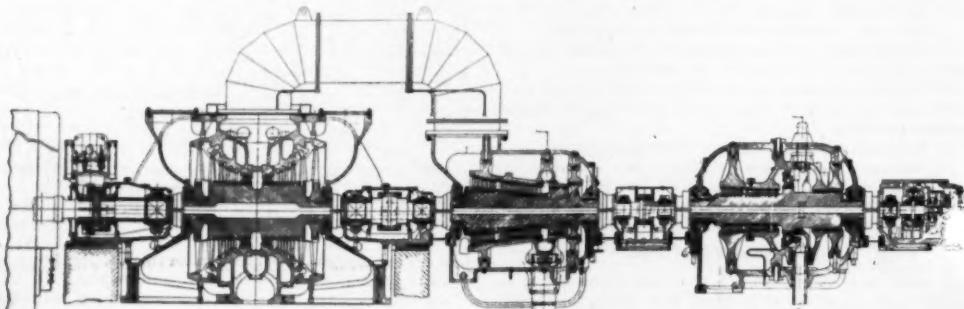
ASSEMBLY OF 65-MW 3600-RPM TANDEM REHEAT TURBINE, THREE-CYLINDER, DOUBLE-FLOW TYPE
